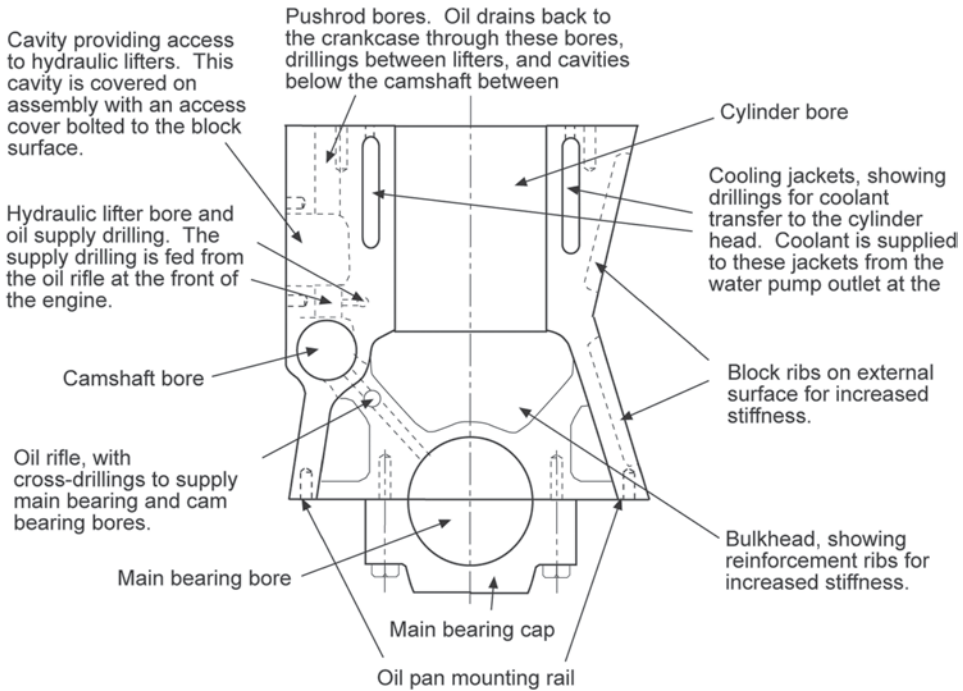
Front-view of in-line automotive cylinder block, identifying typical features
